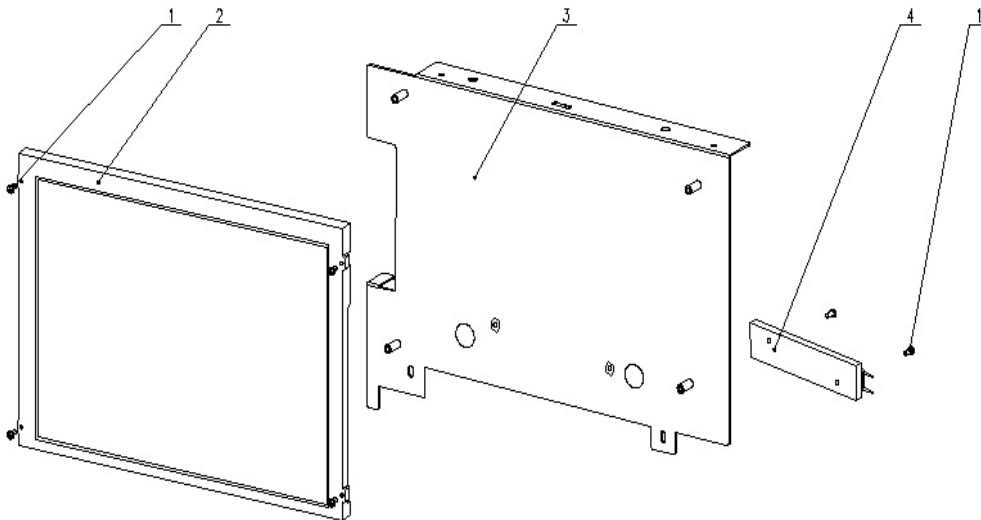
M8 Series Monitor Main Bracket Disassembly Graphics, Exploded
